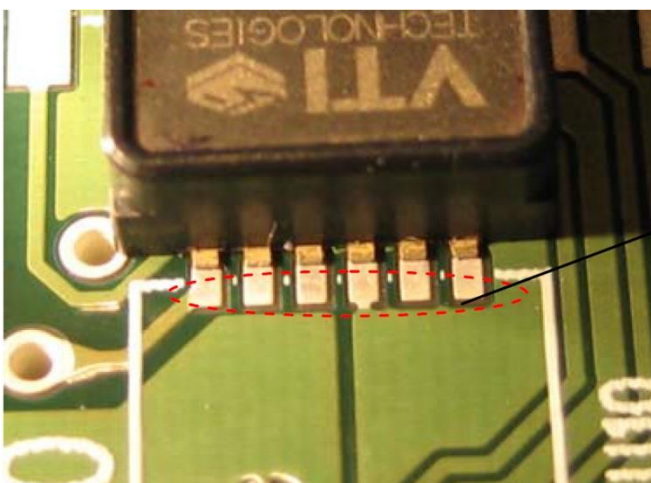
Solder paste on PCB land pads (Note: In this photo the solder pads are not extended).
